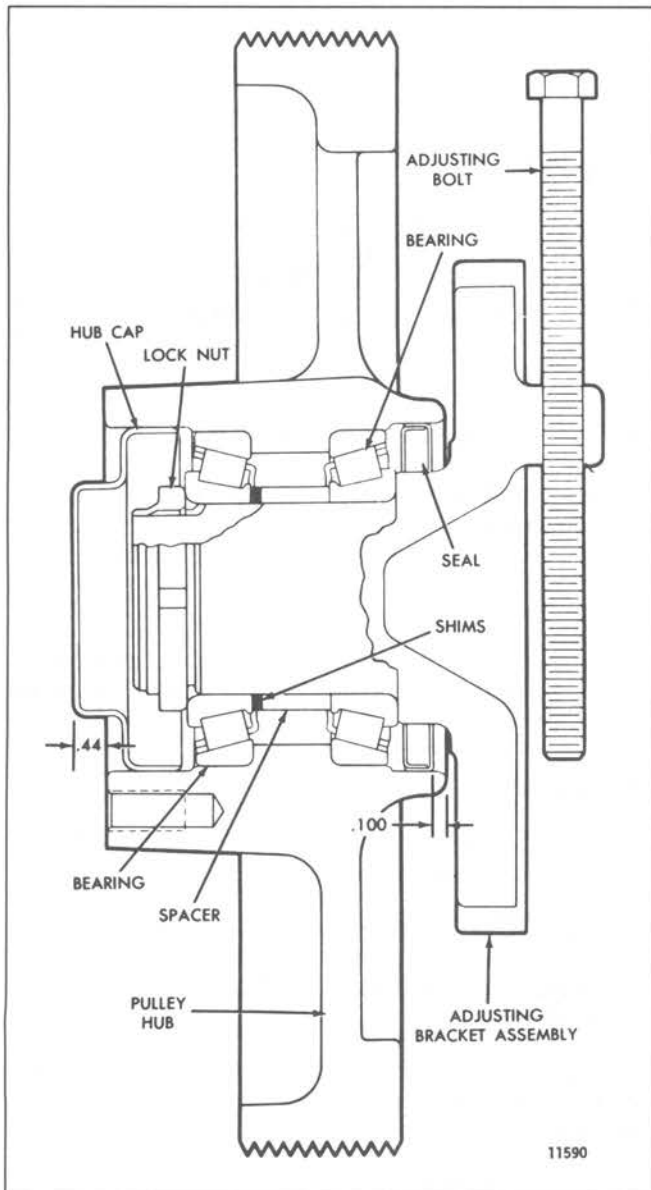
Typical 16V Engine Poly-V Groove Pulley Hub and Adjusting Bracket
